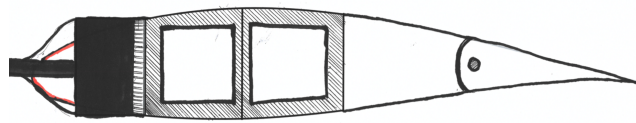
Sketch of a cross section of the wing showing the wing box, electric motor and flap
